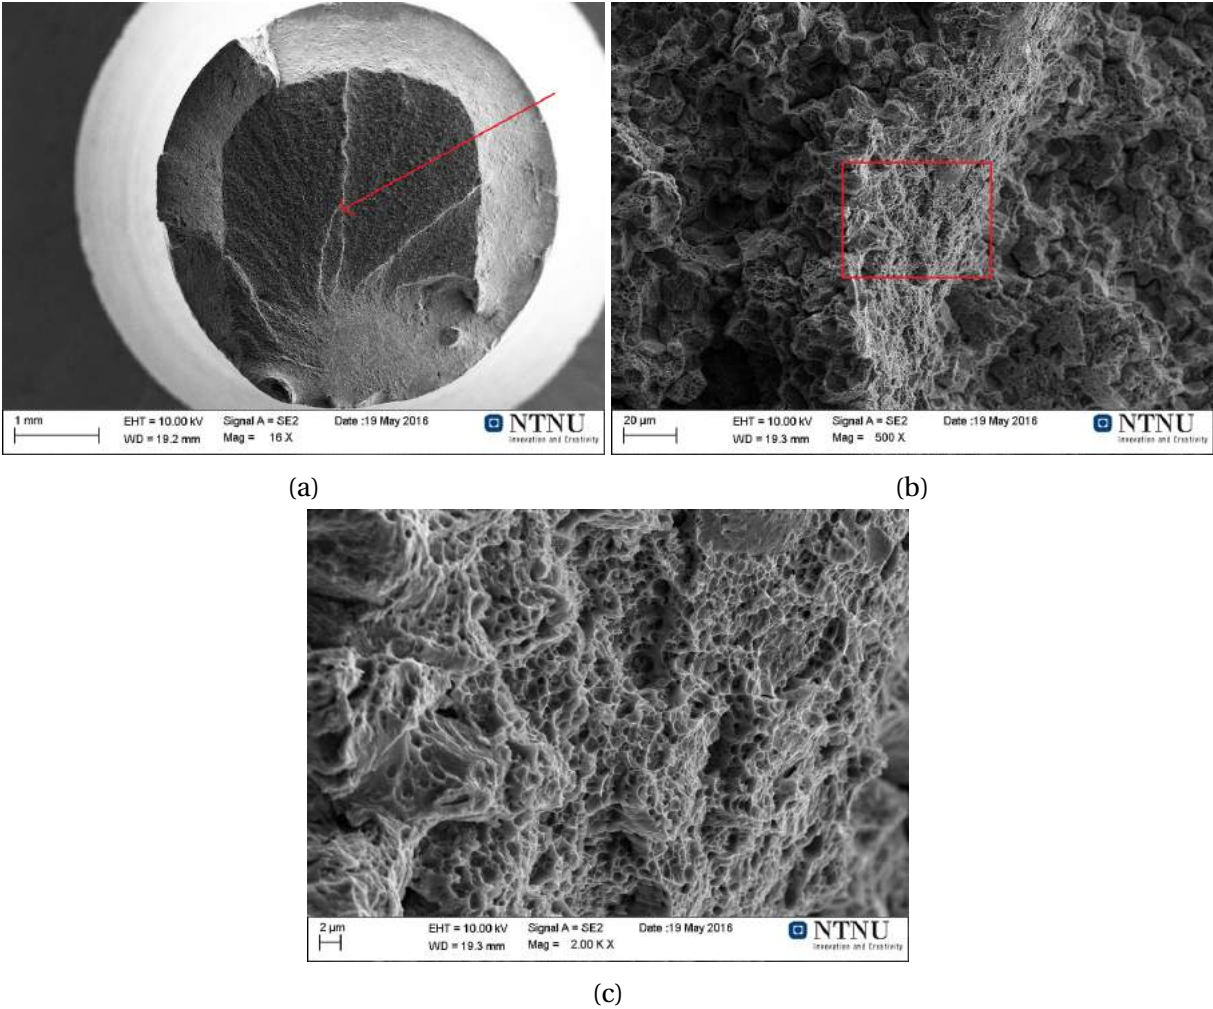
Fracture surface of Al-10%Mg screw extruded machined granulates.
